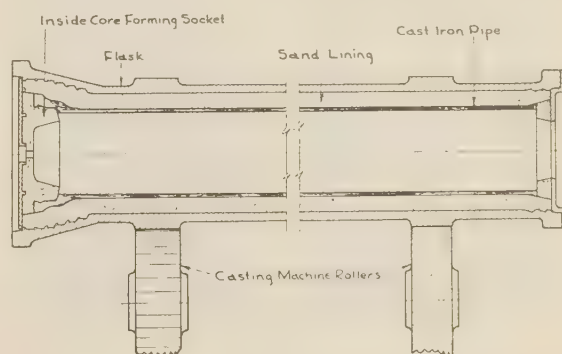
TRUE CENTRIFUGAL MOLD FOR MAKING CAST-IRON PIPE
